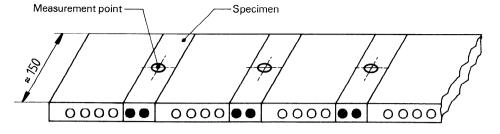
Specimens taken at measurement points cut from full width belt sample
